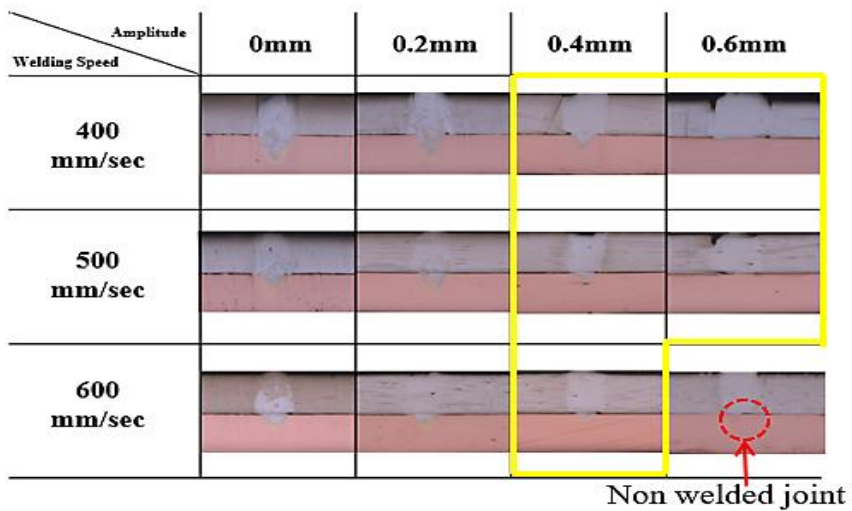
Bead profiles analysis of welded joint with various welding speeds 400~600mm/sec; bead cross section
